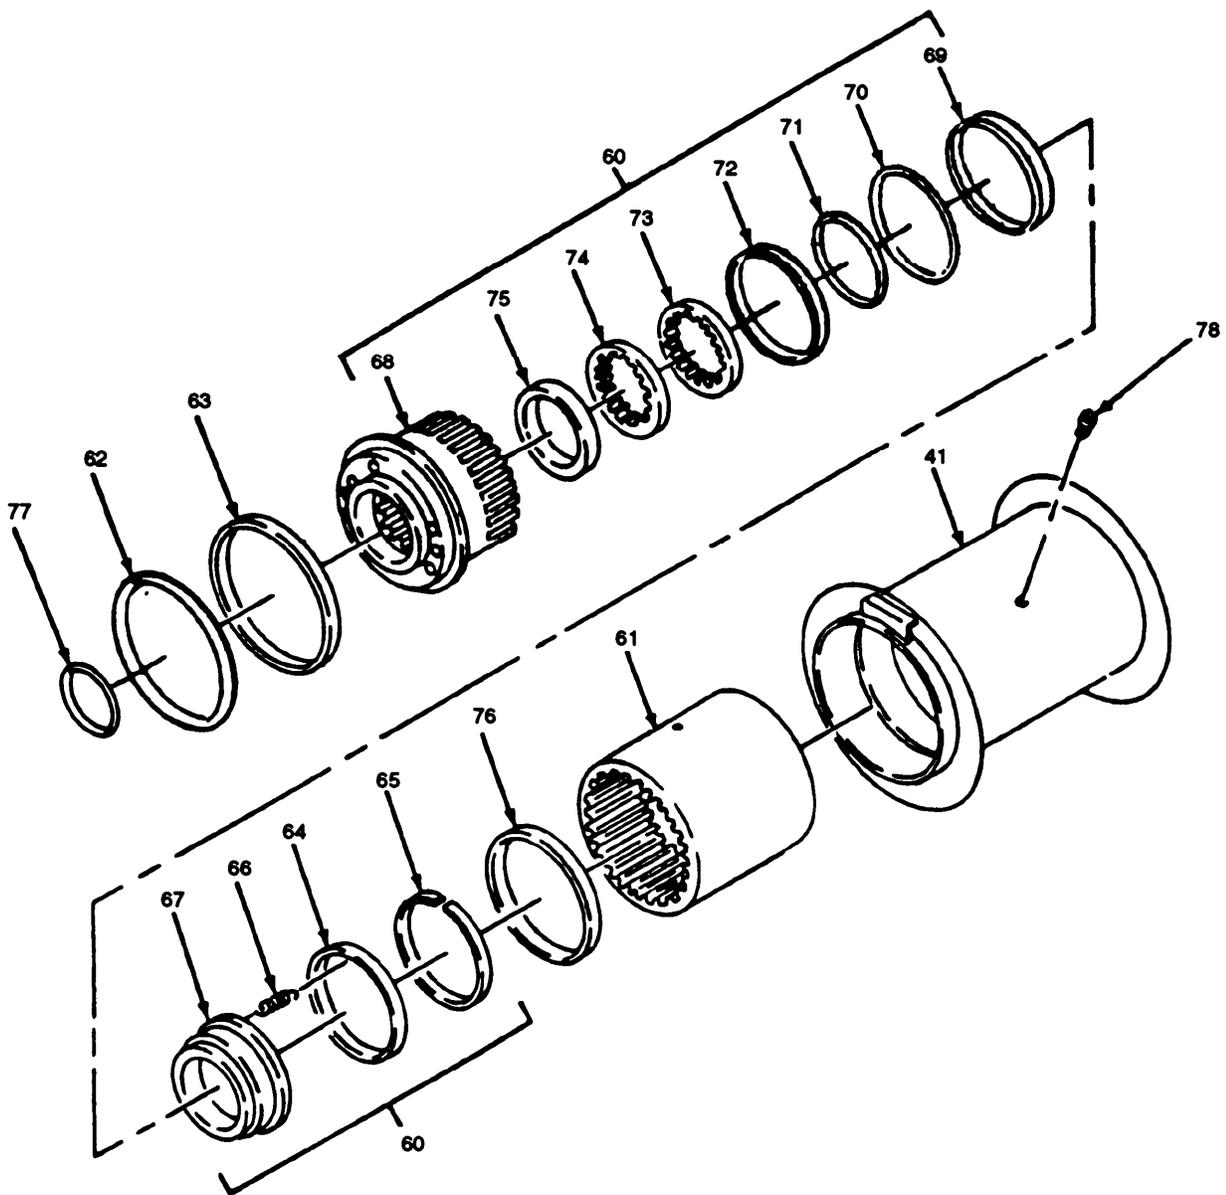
Winch Assembly Model PG-115-043R, Disassembly (Sheet 5 of 5).
